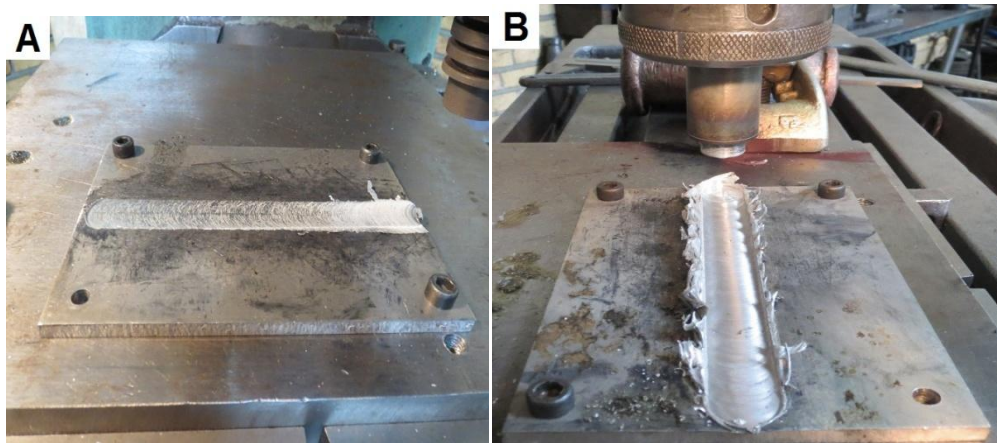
Surface of the samples after processing by no-pin tool (A) and tool with triangular pin (B).
